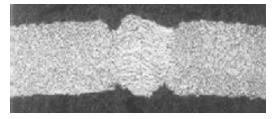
On the left is a photomicrograph of the above sample showing a transverse section. Note the uniform attack across the base metal and weld on both the ID and OD surfaces. The corrosion ratio was 0.68.
